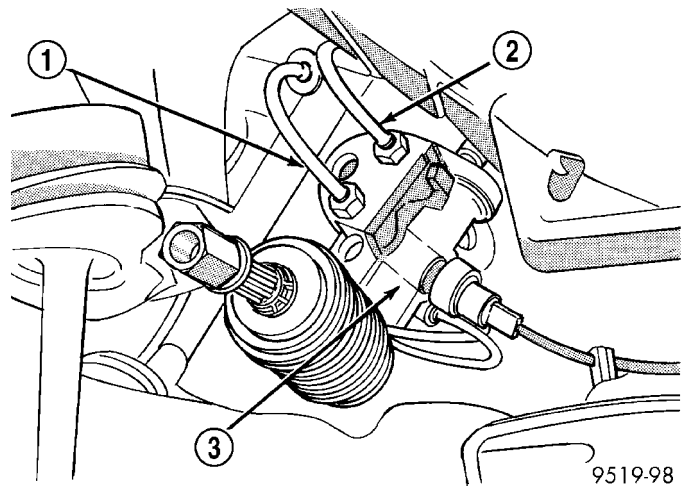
Power Steering Pressure And Return Hose At Steering Gear
